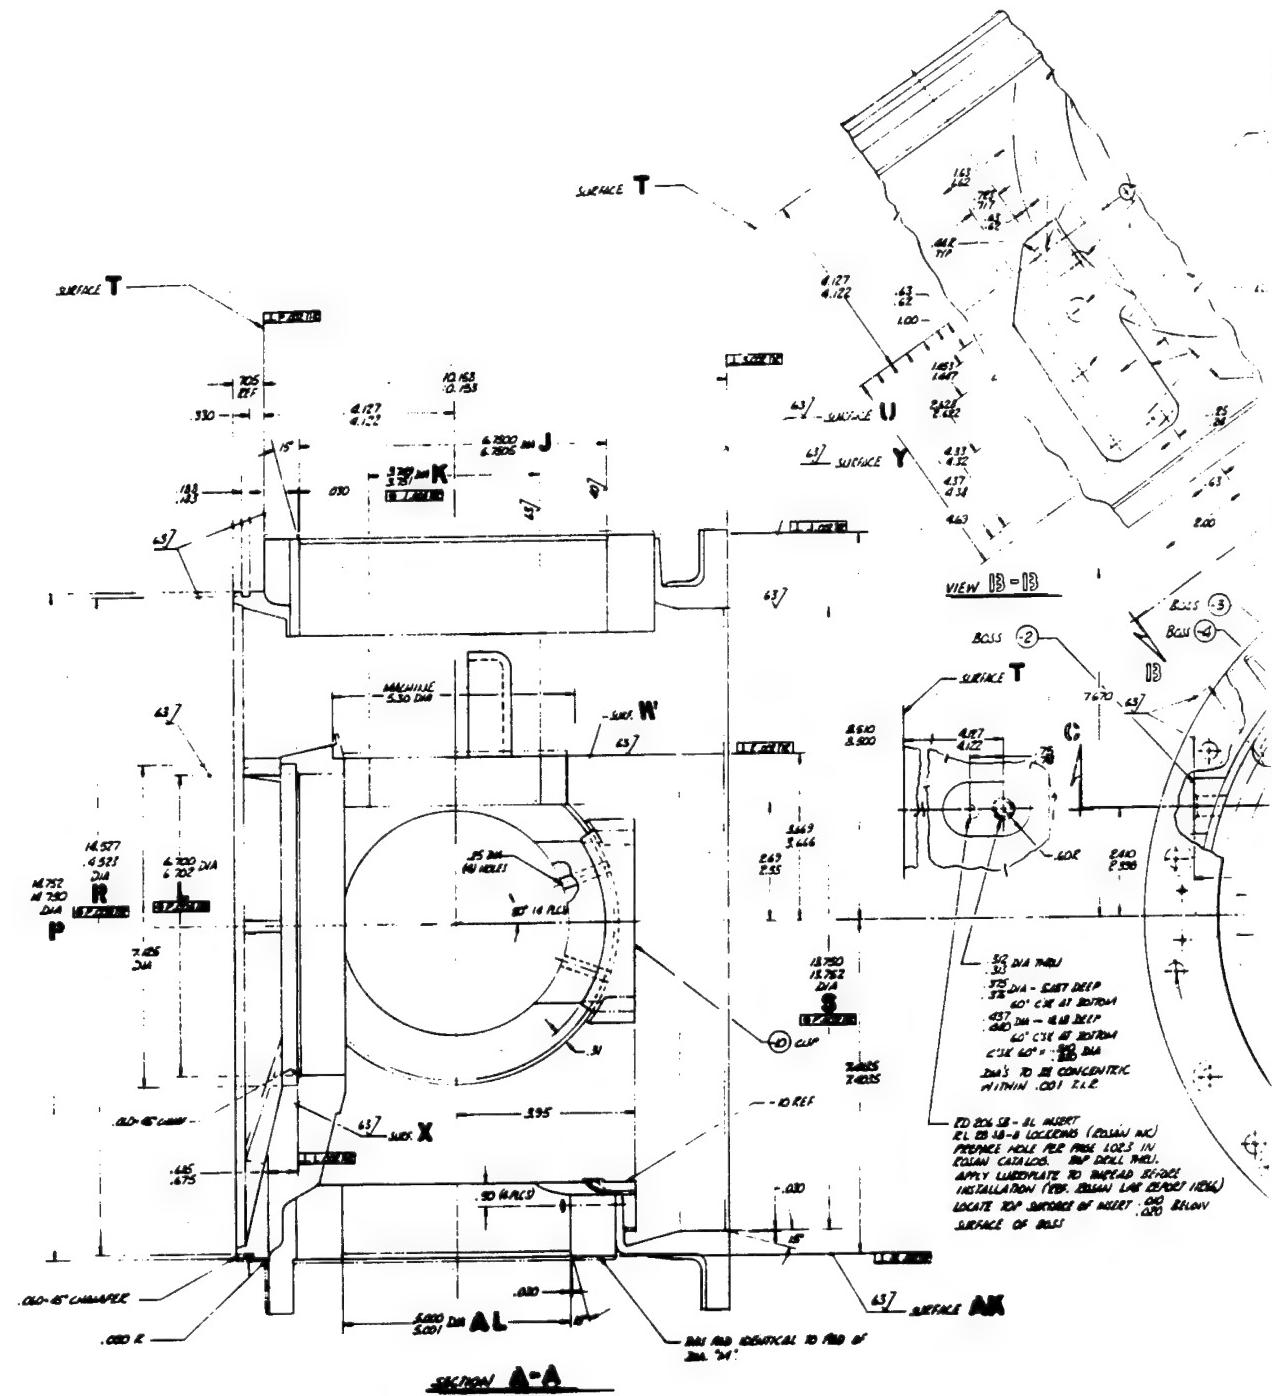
Housing Assembly - Helicopter Transmission, Composite Material
